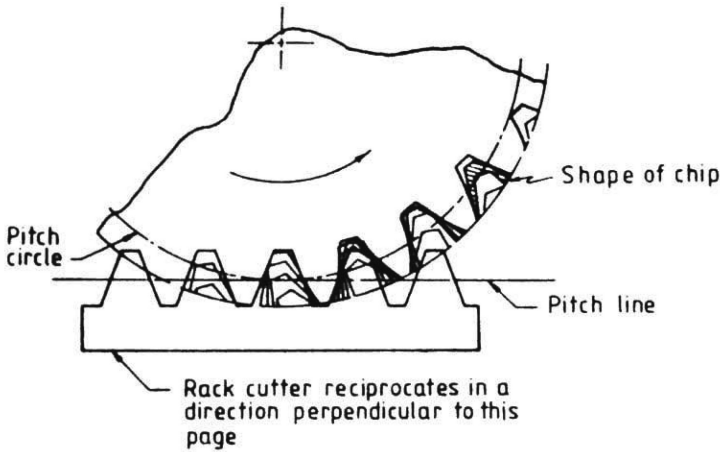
The process of cutting a gear by the use of a rack shaped cutter
